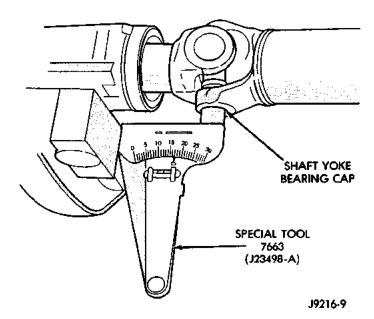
Propeller Shaft Angle Measurement (C)—Typical
